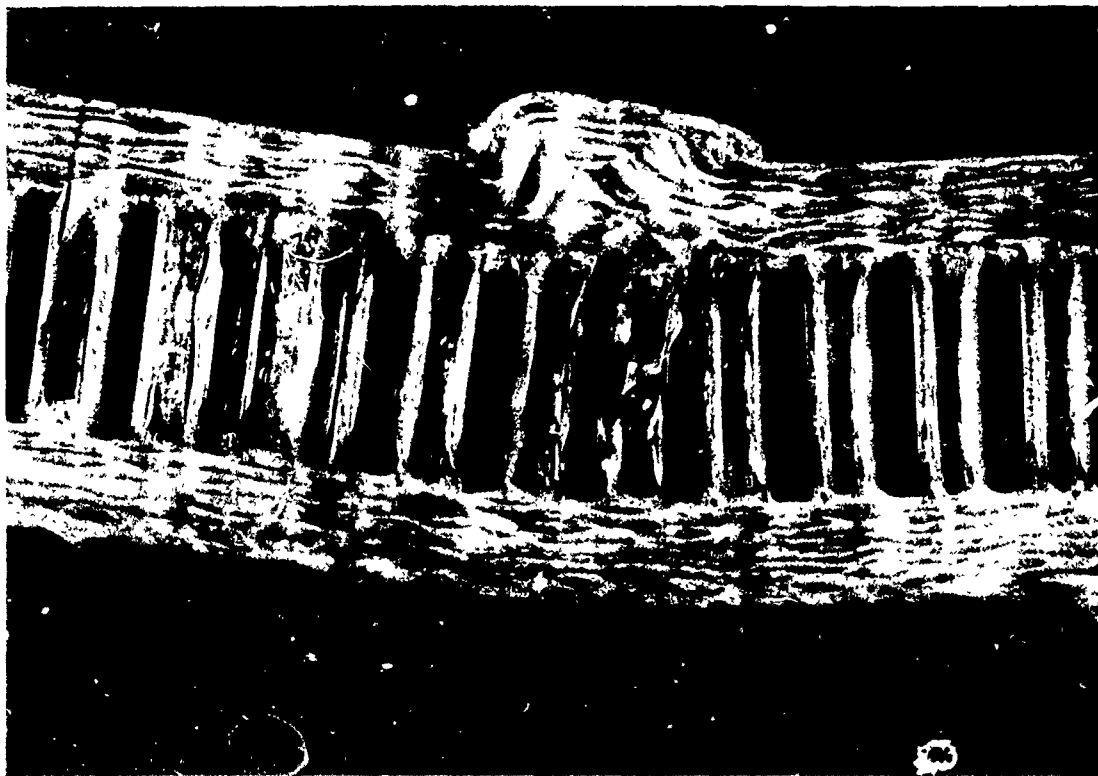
Failure of compression facing of GRP (typical failure, Configuration 2).
